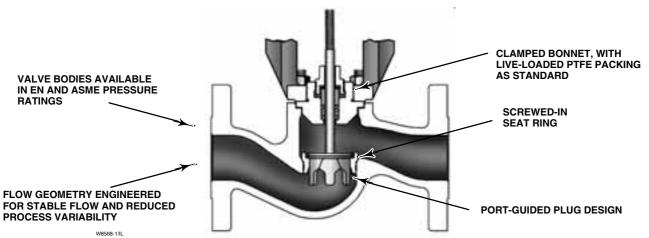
Design GX Control Valve with Port-Guided Plug (Port Sizes of 36 - 136mm)
